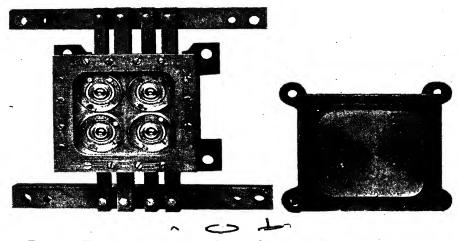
Four-impression subcavity mold showing ejector frame, designed for press having separate pull-back and stripper cylinders. Metal inserts for the molded work are shown below mold.
